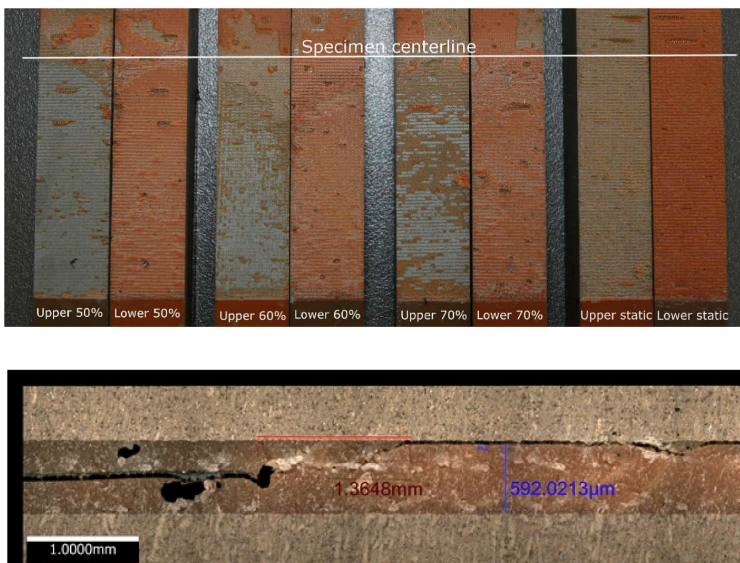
(Above) The fracture surfaces of the fatigue-tested specimens (load levels of 50%, 60%, 70%) and a quasi-static tested ENF specimen. (Below) An optical image is taken from a cross-section of a tested specimen (50%). The red bar presents the approximate distance (1.365 mm) from the pre-crack tip to the stable crack path point near the upper adherend. The blue line presents the thickness of the adhesive layer (0.592 mm).
